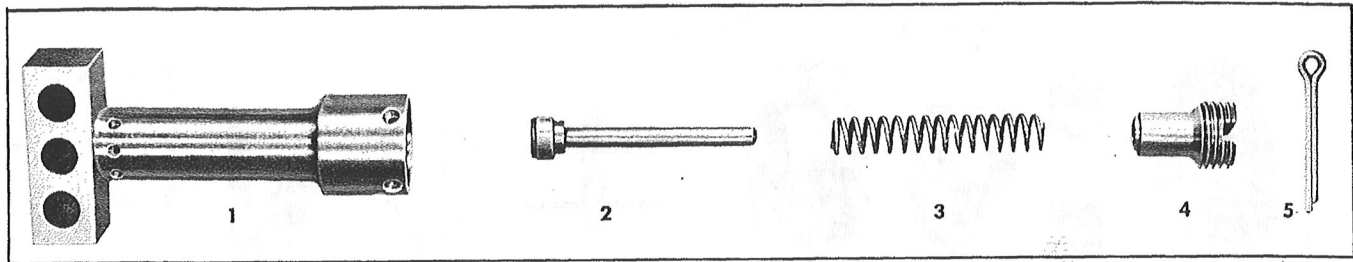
Exploded View of the Check Valve, Models A632S-A1, -A2 Only
